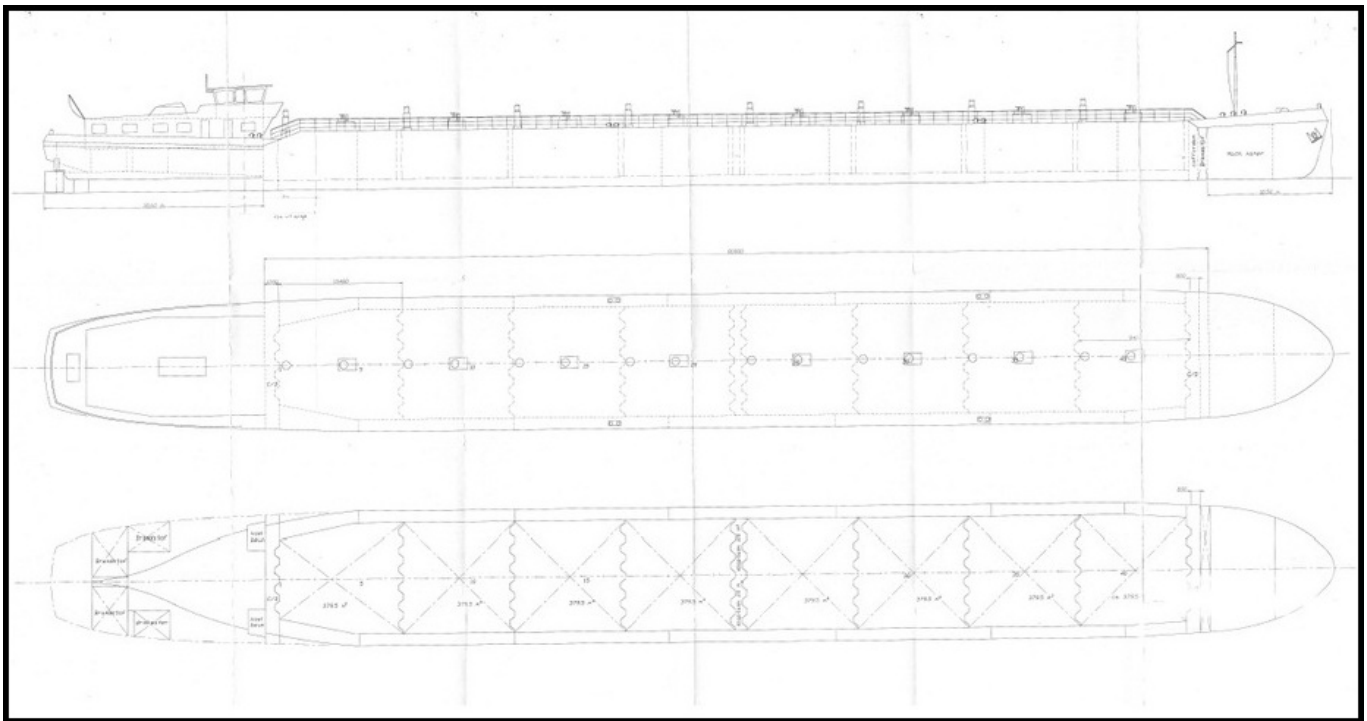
General Arrangement of the investigated Vessel (Type C tank Inland Tanker)
